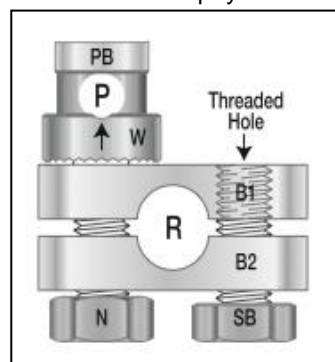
Single SK™ clamp. PB = primary bolt; SB = secondary bolt; N = nut; P = pin-gripping channel; W = washer; R = rod-gripping channel; B1 = threaded half of clamp body; B2 = non-threaded half of clamp body. Arrow points to meniscus in the
